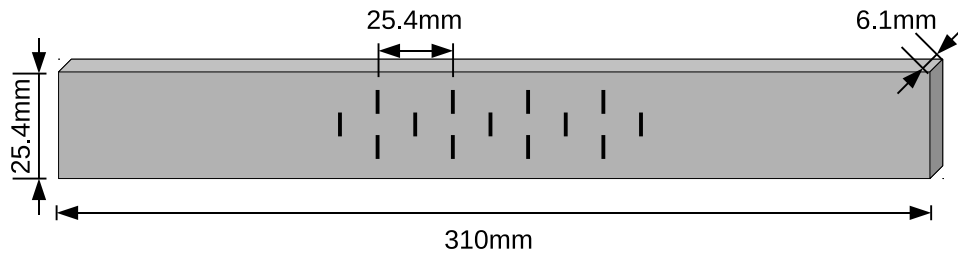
Crack locations of specimen in Set B. Thirteen notches (bold lines in the figure) were made. Five center cracks and eight off center cracks.
